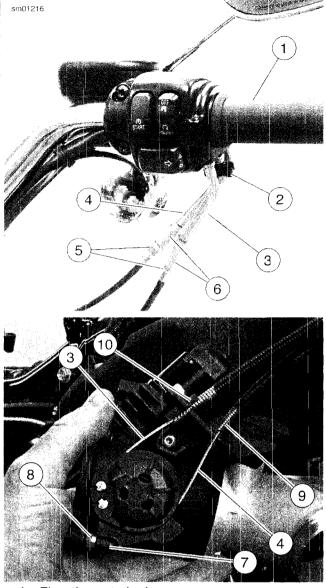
Wire Harness Caddy Assembly: XL Models
